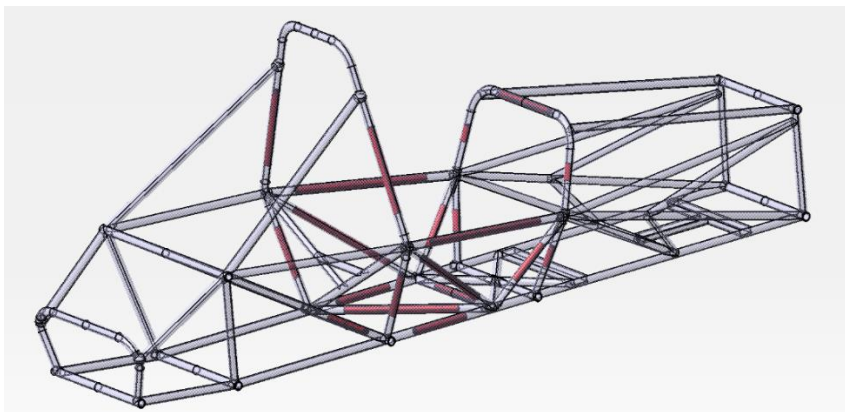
Honeycomb inserts considered only around driver area – shown with red.
